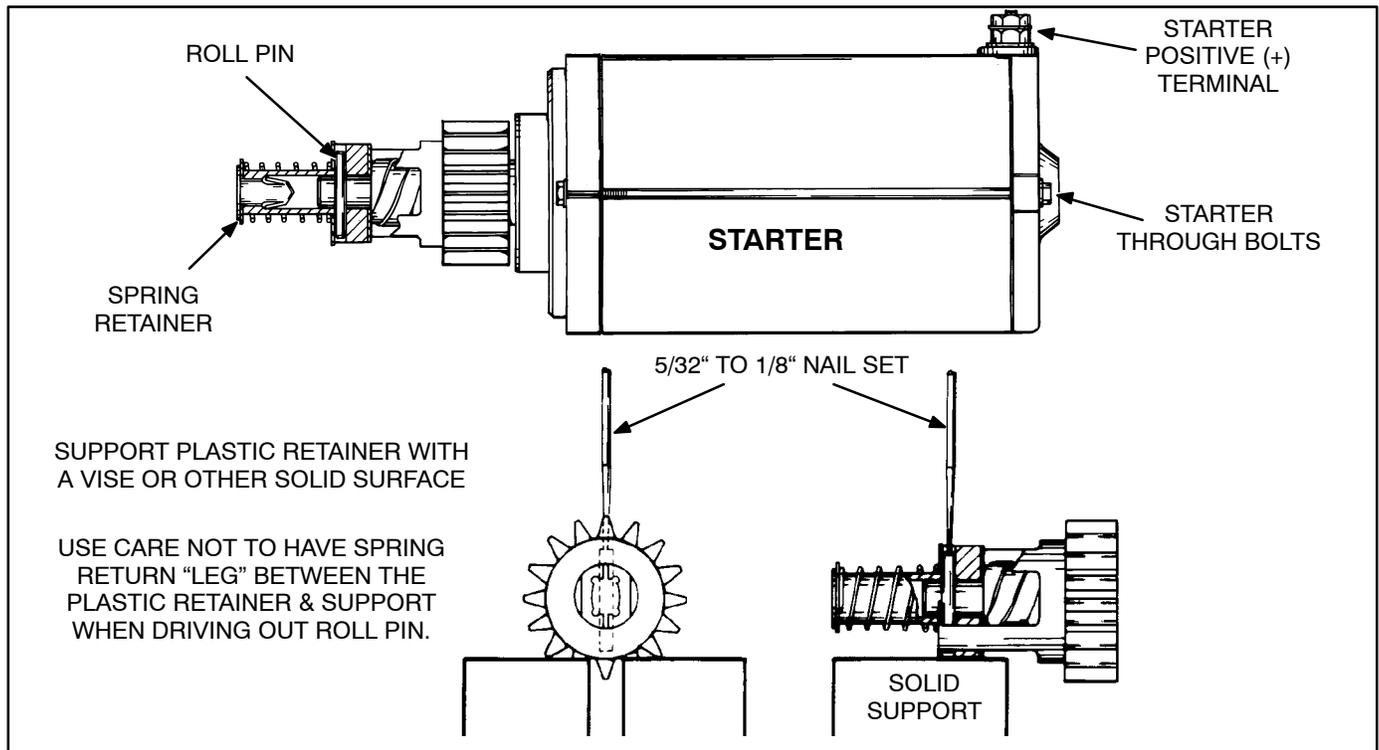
DRIVING ROLL PIN OUT OF STARTER ASSEMBLY
